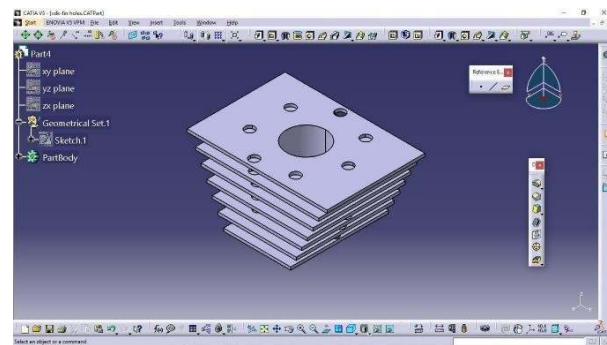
Design of Modified Rectangular Shape Edged Engine Fin
